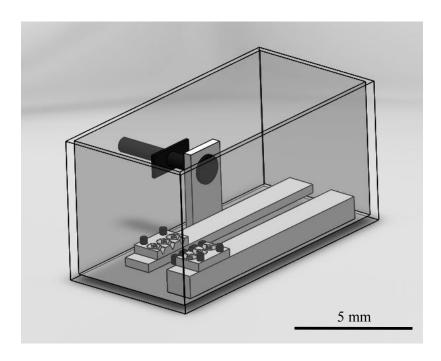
DEVICE ASSEMBLY WITH SYRINGE AND TISSUE MOLD PLACEMENT (EXACT DIMENSIONS NOT SHOWN)
